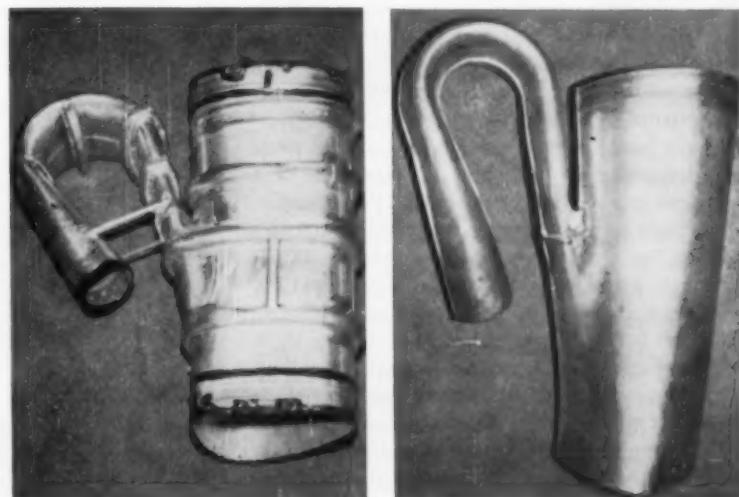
Air Conditioning Duct for a Jet Airliner. Left, welded 6061 aluminum part; right improved design in the form of a chemically milled EZ 33 casting. Change to magnesium casting cut weight by  $\frac{1}{4}$  lb. and cost by \$800 per part. (Courtesy South Gate Aluminum and Magnesium Co., Southgate, Calif.)
